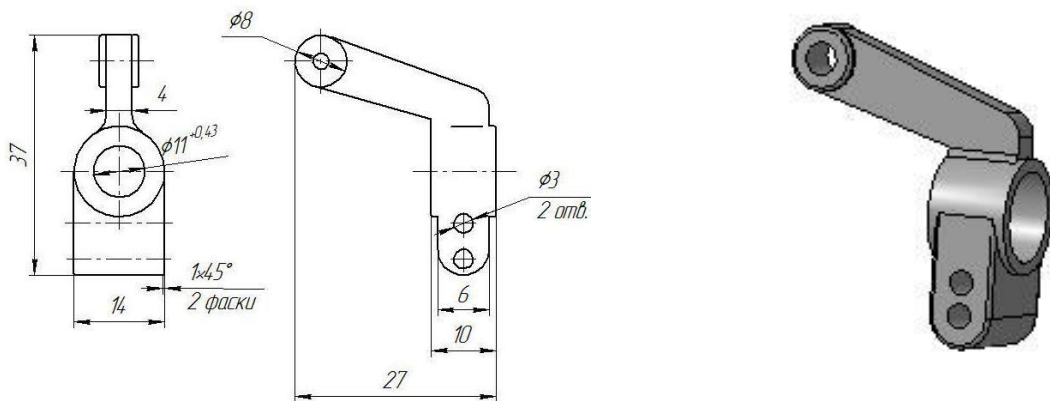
Drawing and 3D model of the hub of the rear wheel
